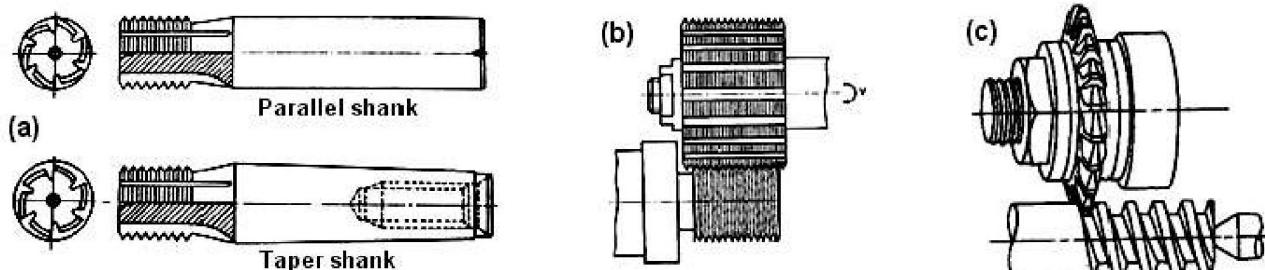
(a) Internal thread milling cutters (b) Short thread milling cutter (c) Long thread milling cutter
